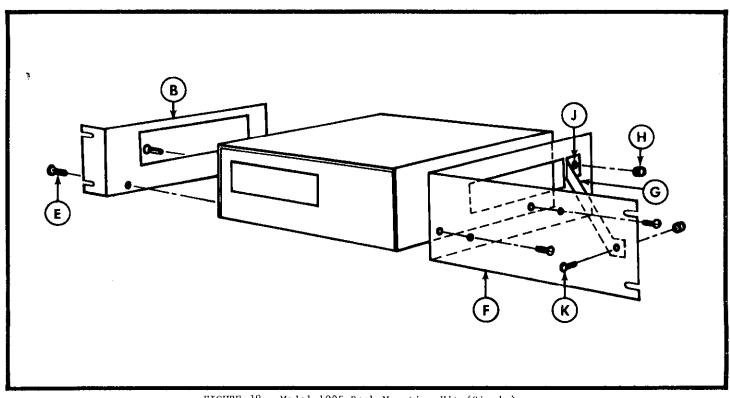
Model 1005 Rack Mounting Kit (Single). (Refer to Table 7-5.)
